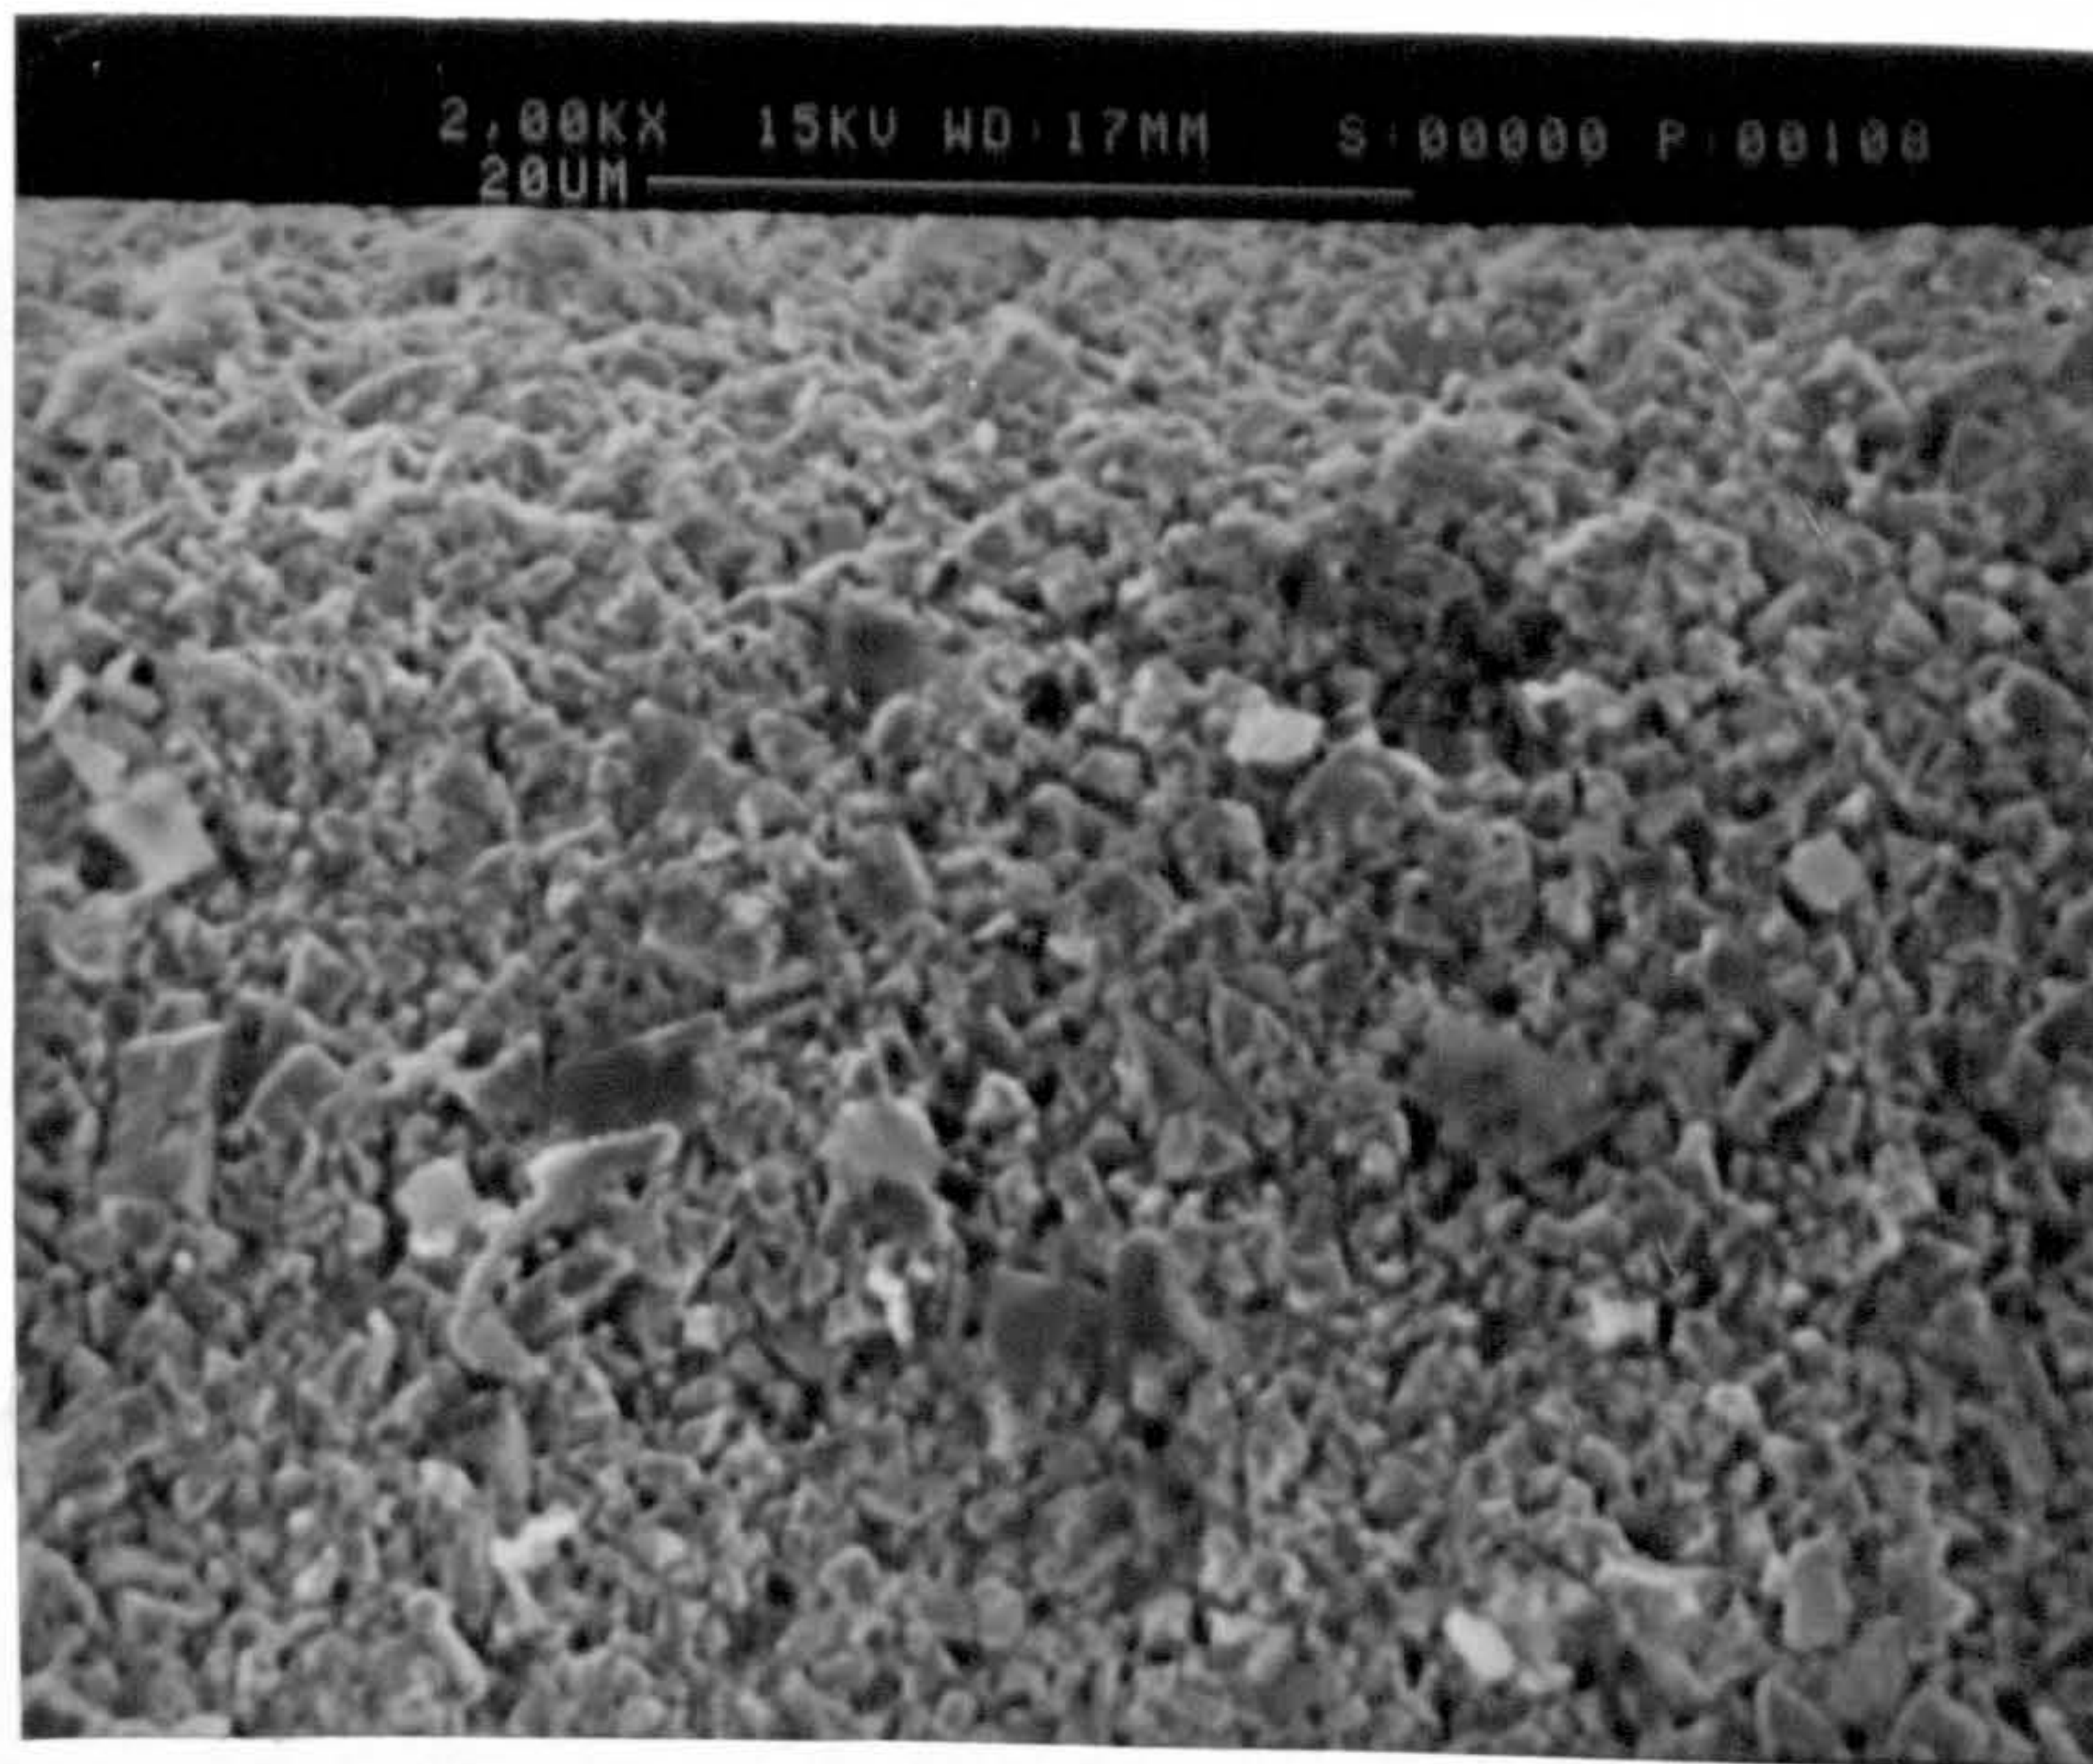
Magnified view of the flank wear land of a K20 carbide tool showing disaggregation of carbides
